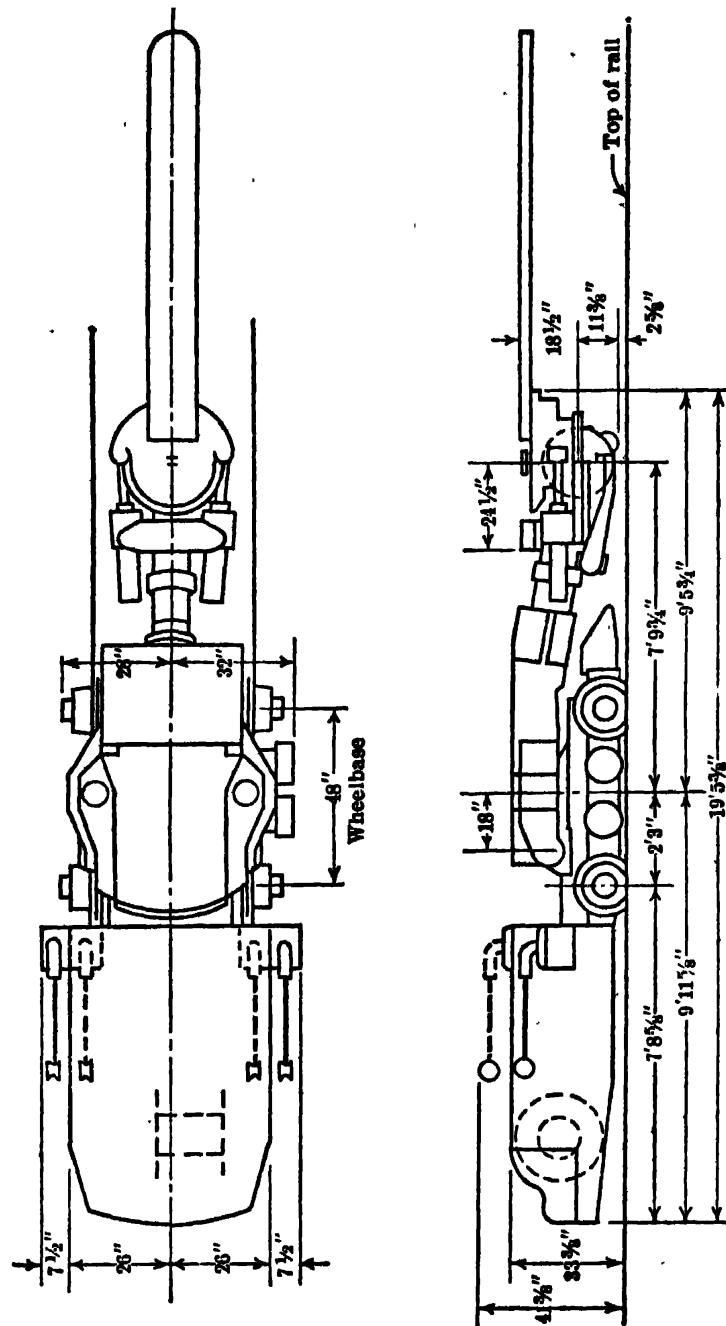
Jeffrey Track Coal Cutter, Universal Type, Bottom, Top, or Center Cuts, or for Shearing
